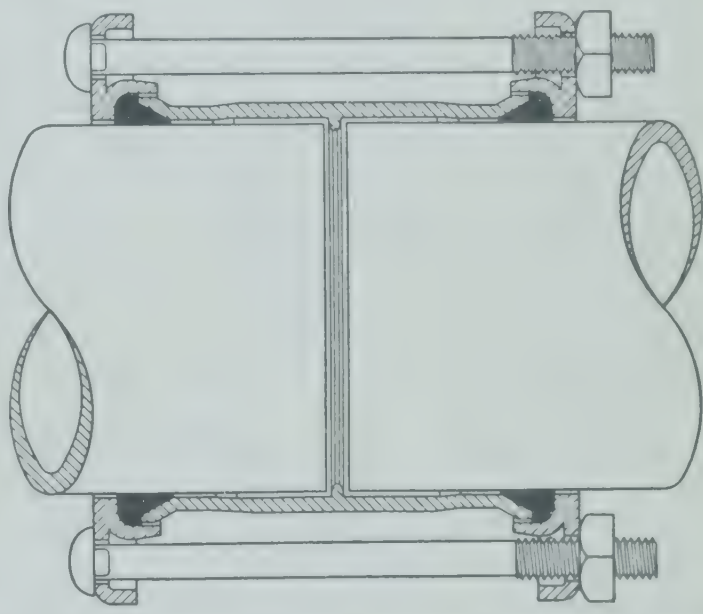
Dresser coupling (sectional drawing). (Dresser Industries.)
